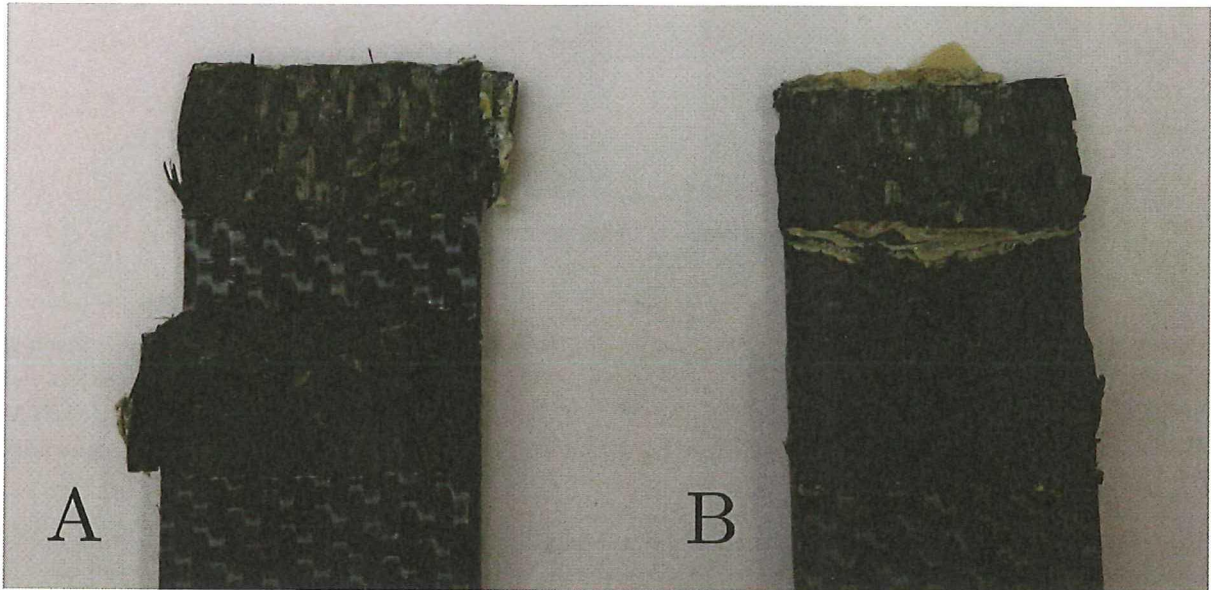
| Fracture surfaces of Toho Tenax material, 12.7 [mm] overlap, welded with the  $\varnothing$  40 [mm] cylindrical sonotrode and a welding force of A) 300 [N] (#4 appendix B), B) 1000 [N] (#12 appendix B) using optimum welding conditions
